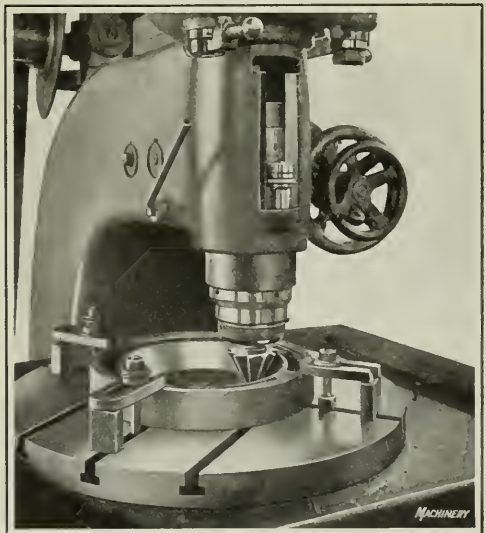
Milling a 30-degree Bevel on a Gear Blank
